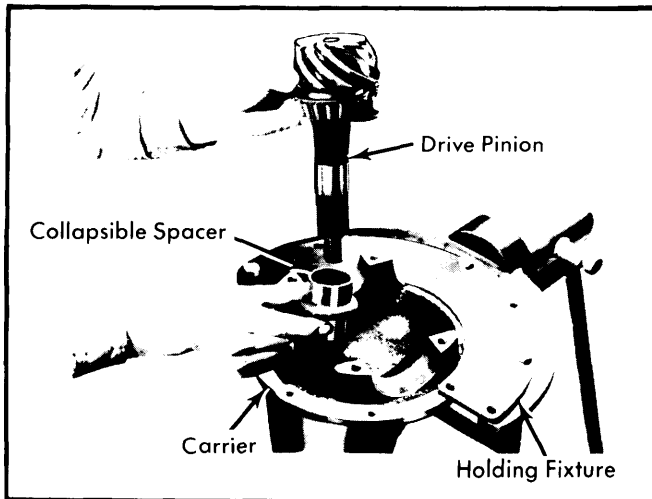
Installing Drive Pinion Bearing Collapsible Spacer
